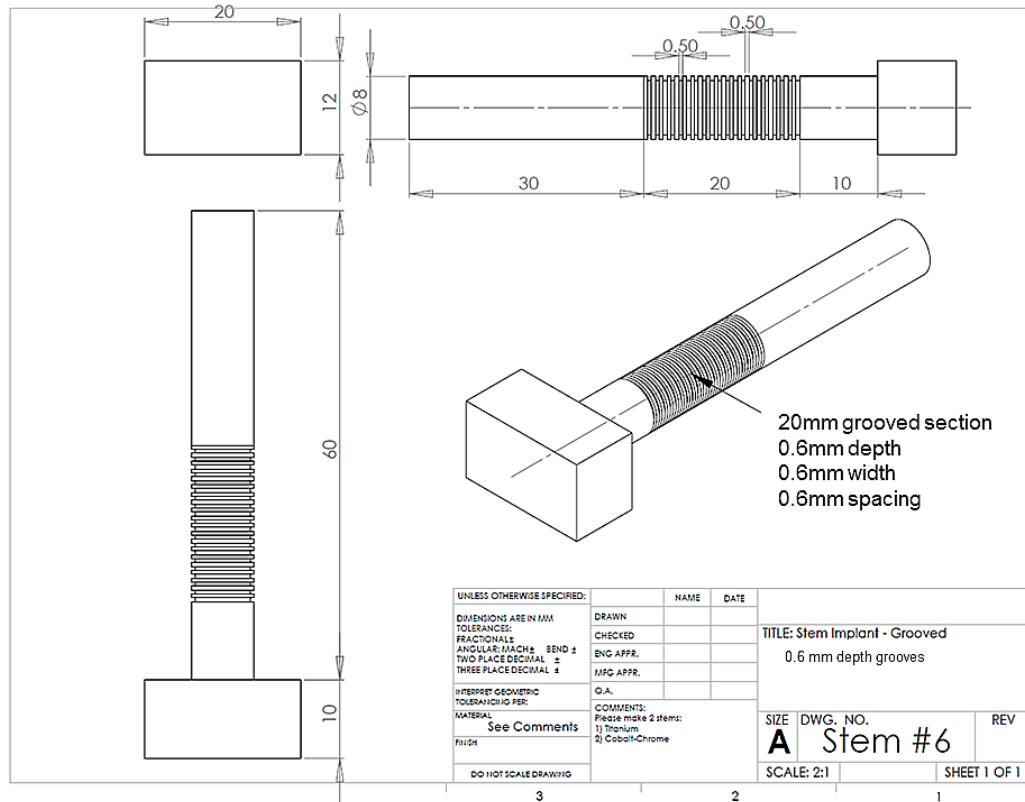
Engineering Drawing of 0.6 mm Grooved Implant Stem
